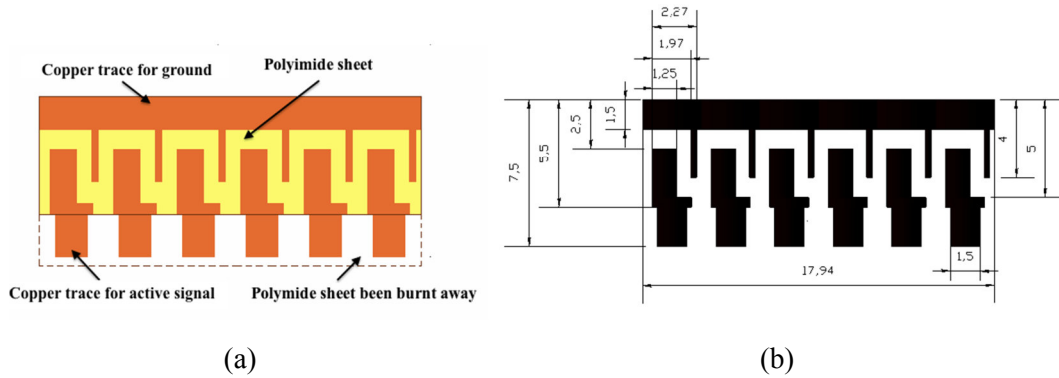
(a) Schematic drawing (b) dimensioned sketch (in millimetre) of flexible printed circuit design for interconnection
